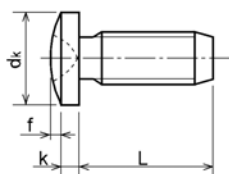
/7) MECHANICAL STANDARD PARTS (SCREWS)
